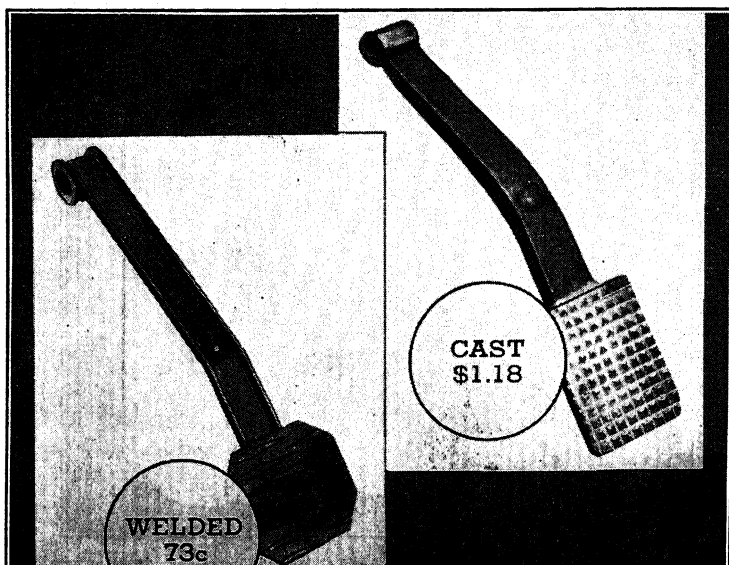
Built from a piece of 2-inch channel and checkered floor plate, the unbreakable welded foot treadle costs 73c. The old cast iron treadle, which occasionally broke in service, cost \$1.18.
